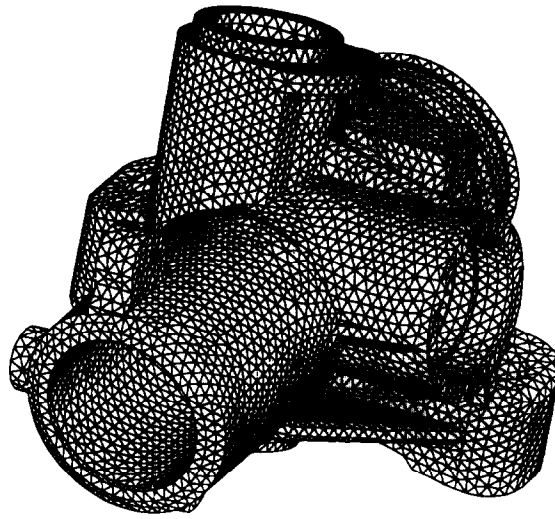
Steering gearbox (courtesy of Peugeot SA).
